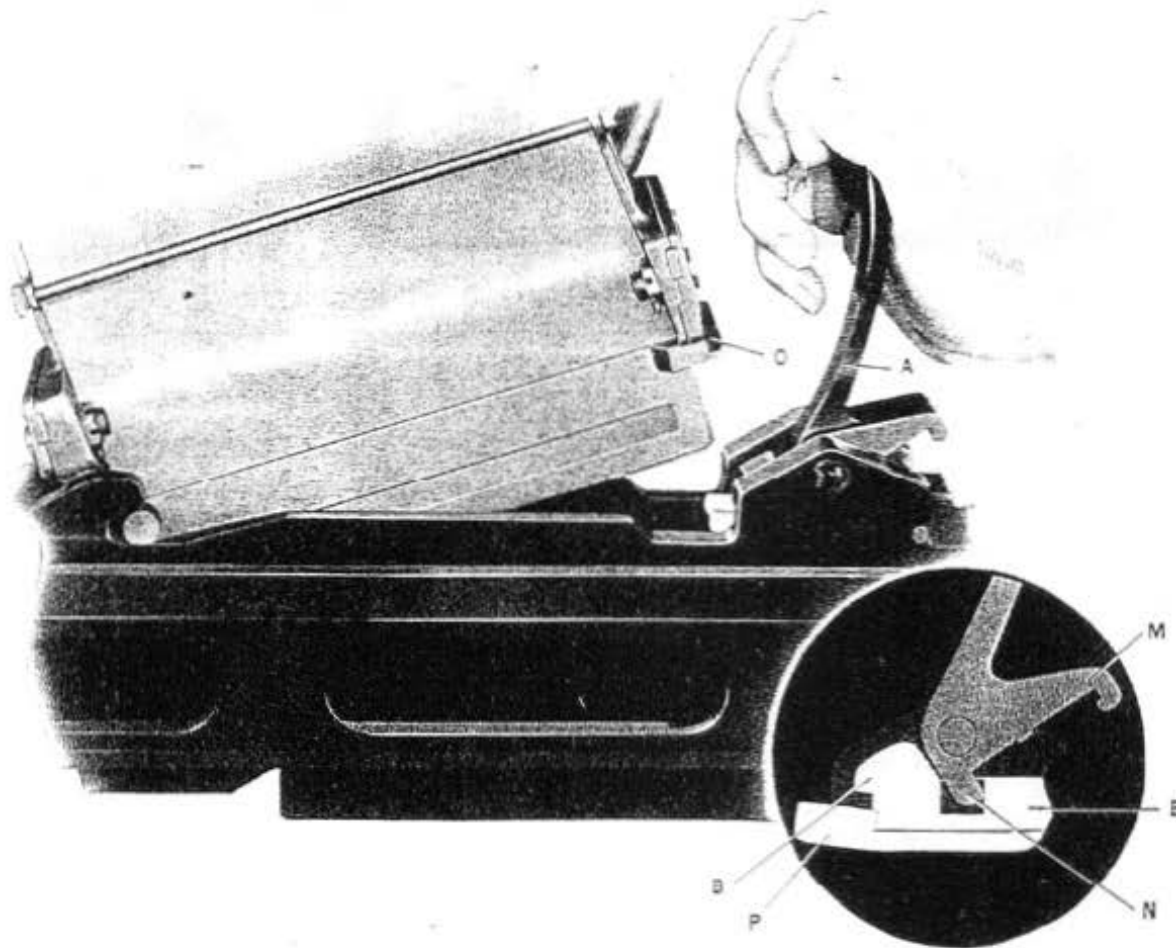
Unshipping a magazine—ejector moved to rear by hand pressure on catch lever and held to rear by catch
